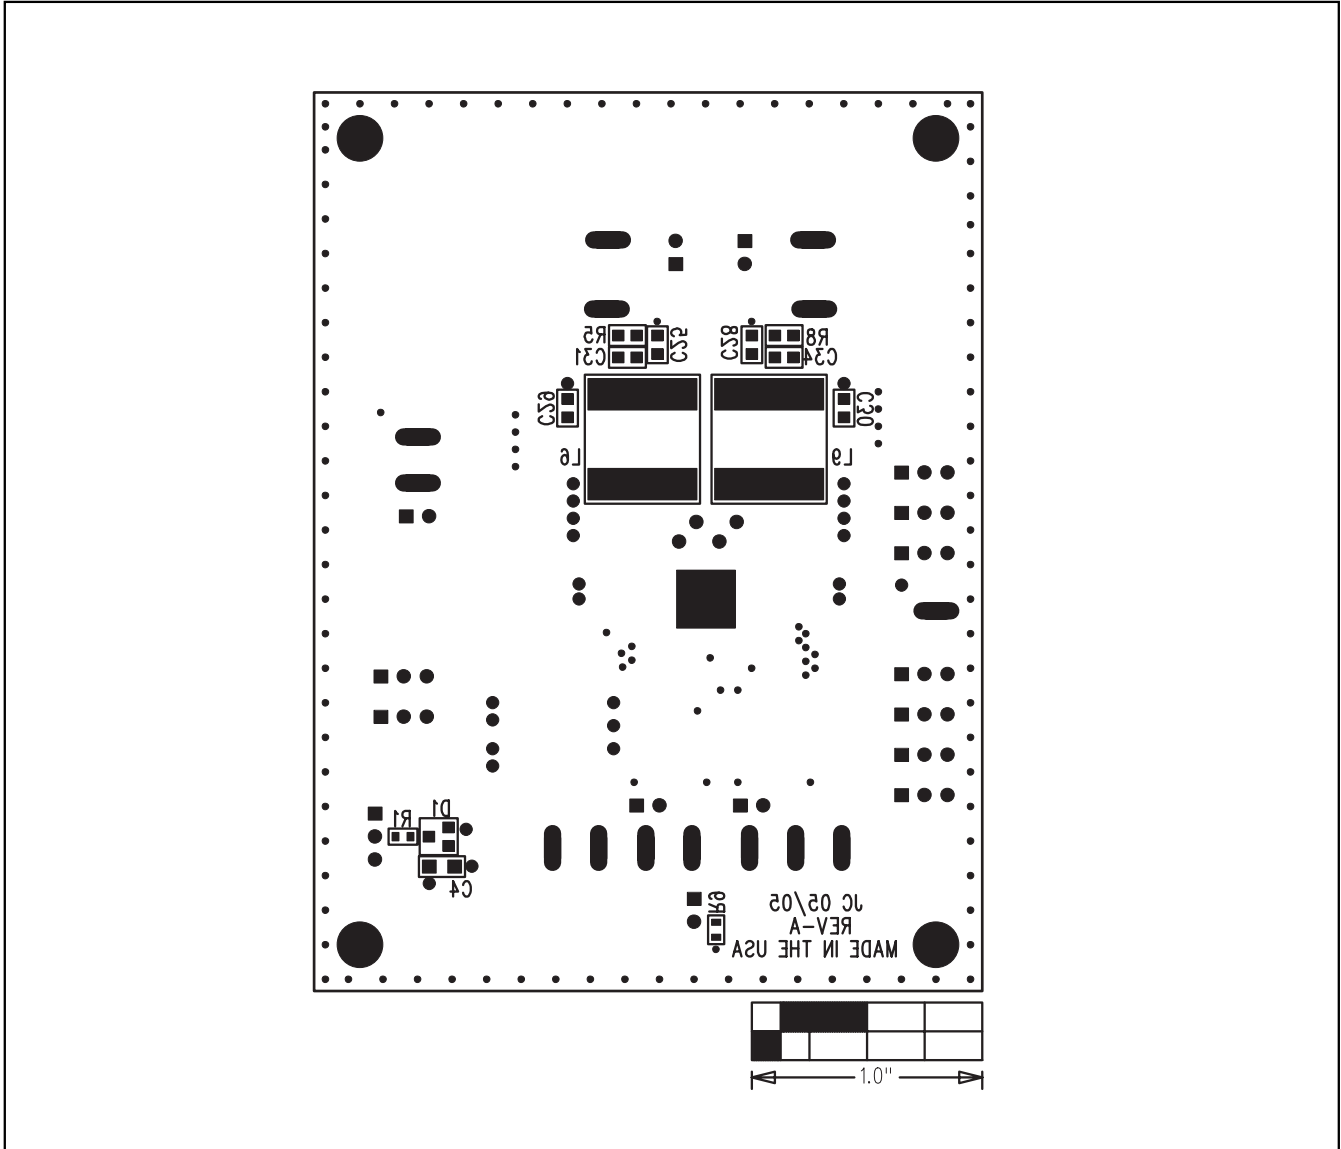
MAX9708 EV Kit Component Placement Guide—Solder Side
